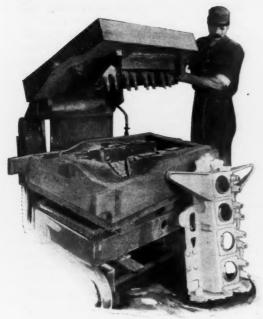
First step in making an engine base. Onc of the moulding machines, showing the sand mould on the machine and the pattern on the upper portion. When the mould is poured full of melted aluminum the casting shown at the side is the result
